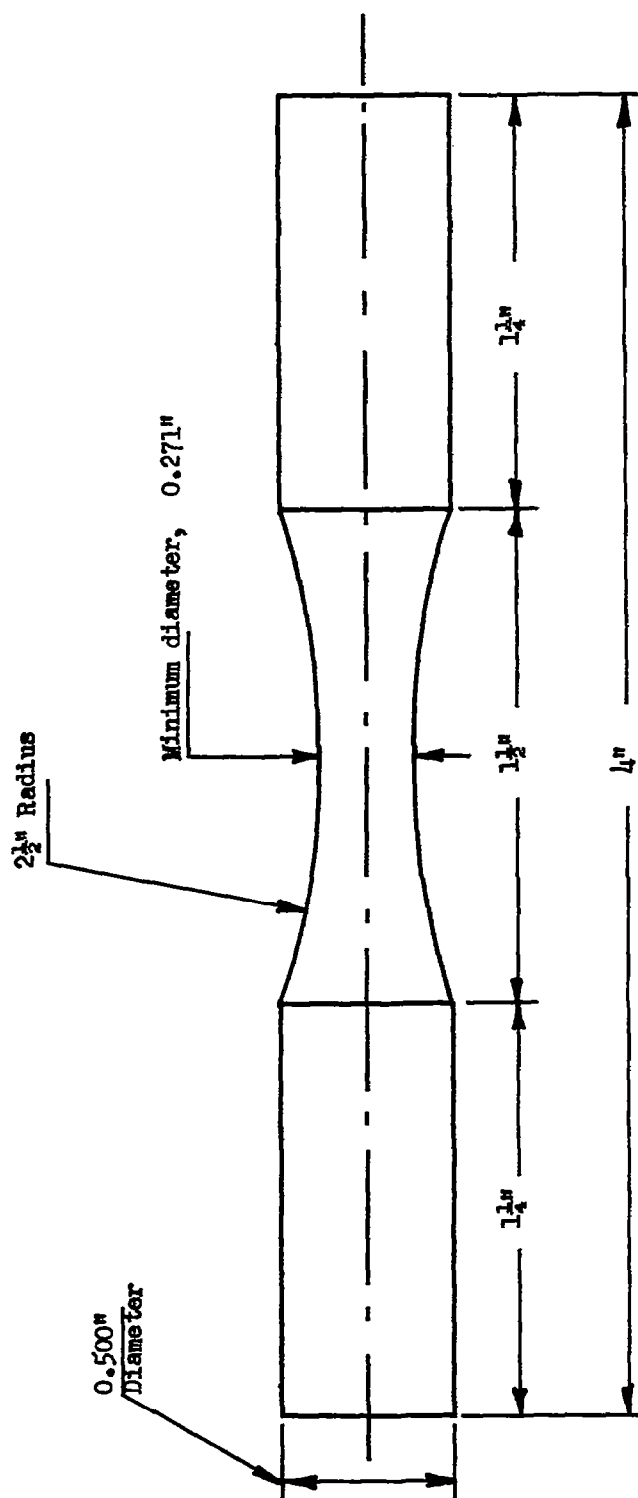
Dimensions of $\frac{1}{2}$ -inch-diameter rotating-beam fatigue specimen.
